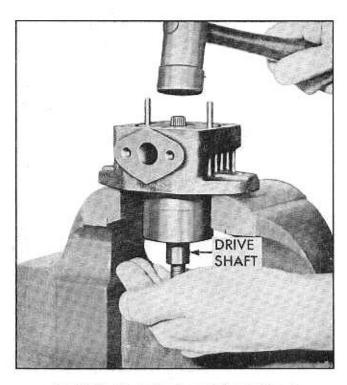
Removing Pump Drive Shaft and Bearing from Pump Body
